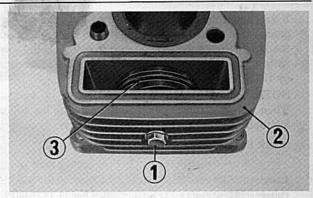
(1) Bolt (2) Cylinder (3) Cam chain guide roller
